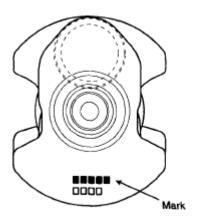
Identifying Cylinder Block Crankshaft Journal Bore Mark Location Courtesy of HYUNDAI MOTOR CO.
